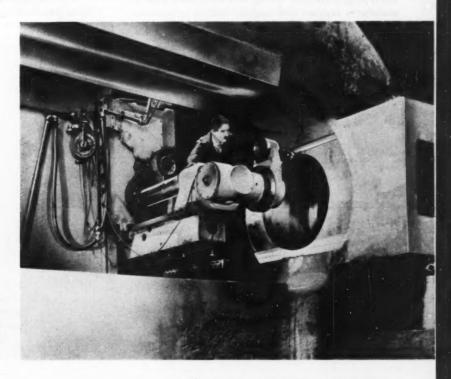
Underarm support and an offset milling head are employed to machine the inner top surface of the 138-ton rolling mill housing—the same part shown in Fig. 1.
